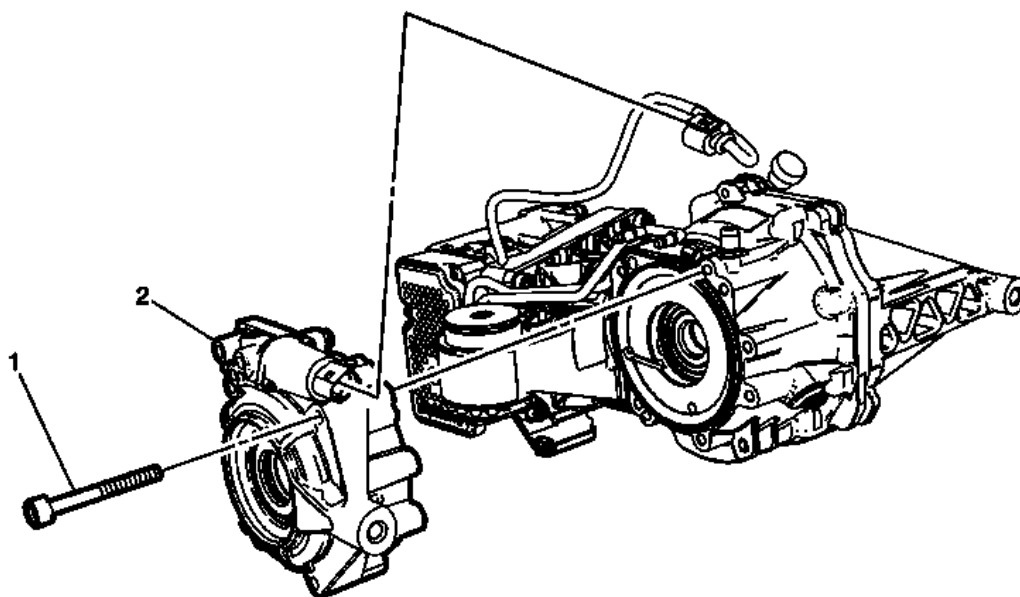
View Of Limited Slip Differential Clutch & Bolts
